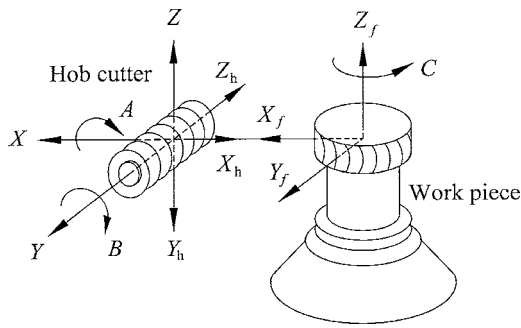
A schematic drawing of a 6-axis CNC hobbing machine
